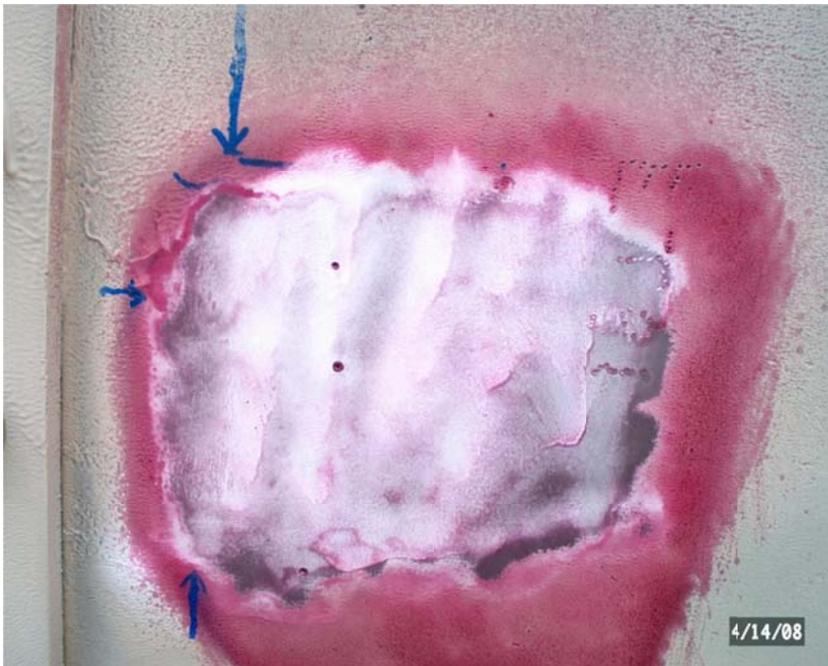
Dye Penetrant Test on Outside Face of Inboard Flange.
